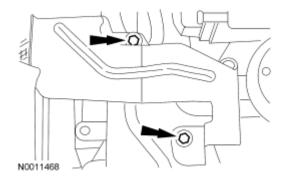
Intake Manifold Shield Courtesy of FORD MOTOR CO.
